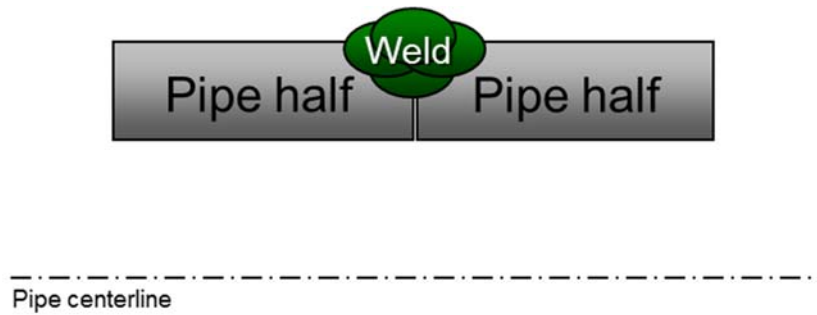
Schematic showing girth weld installation and defect.
